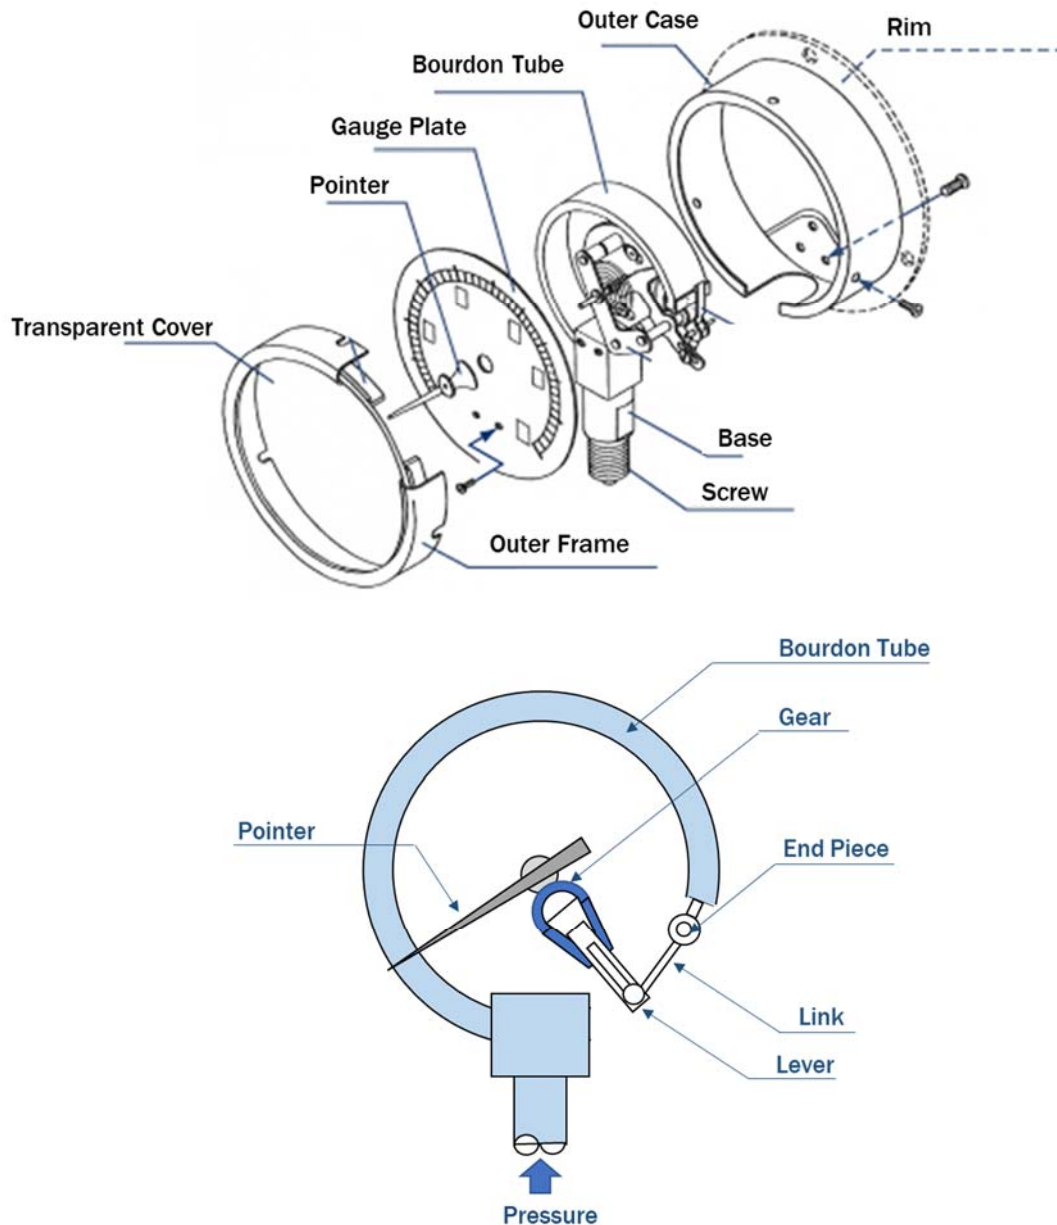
Mechanism of Bourdon Tube Pressure Gauge
